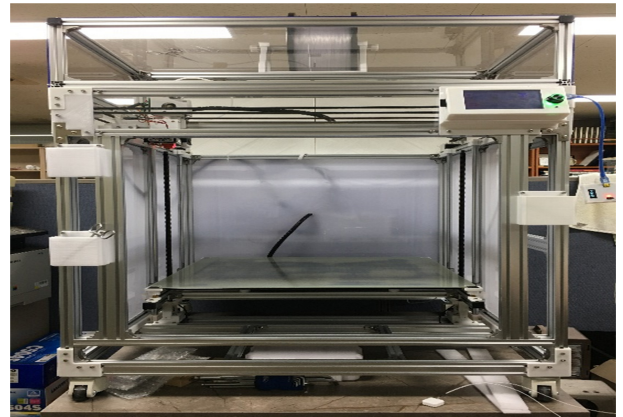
FDM 3D printer with 500 × 500 × 450 printing size
